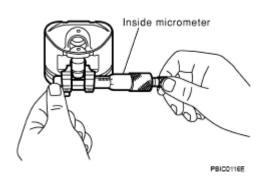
Measuring Inner Diameter Of Piston Pin Hole
